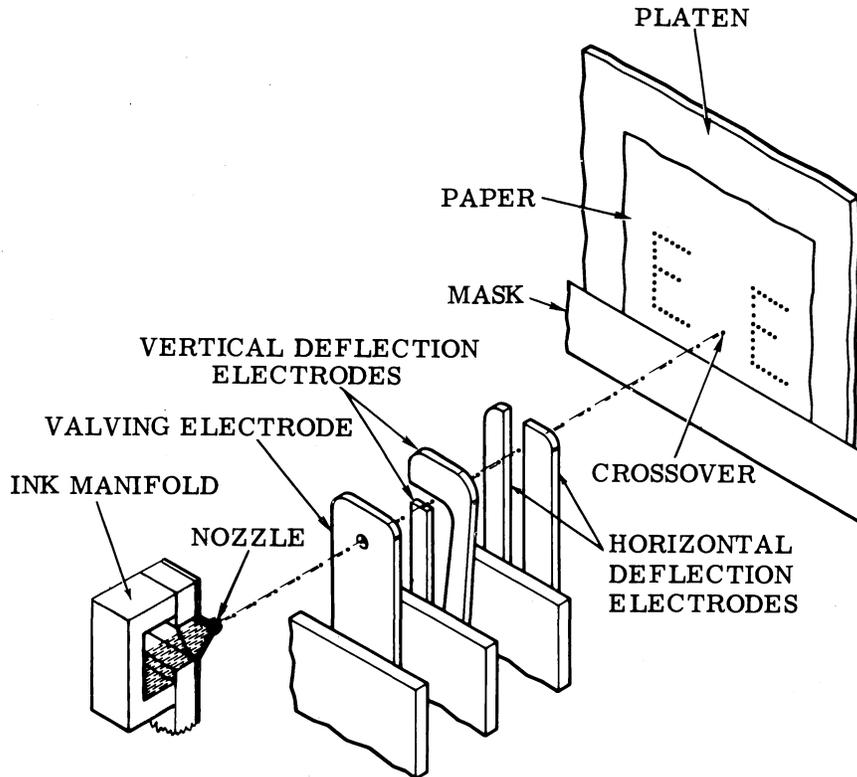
Ink Manifold, Modulating Electrodes, and Mask Assembly
